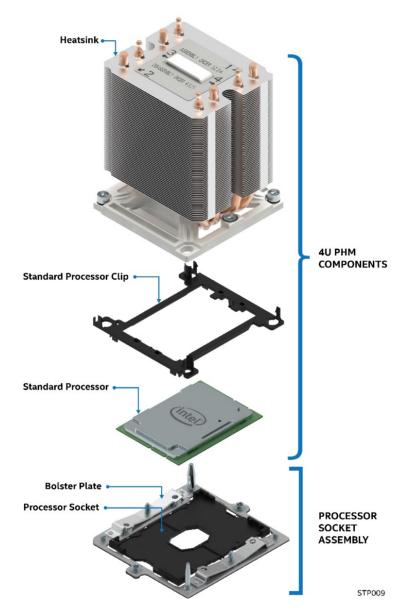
Processor Heat Sink Module (PHM) and Processor Socket Reference Diagram
